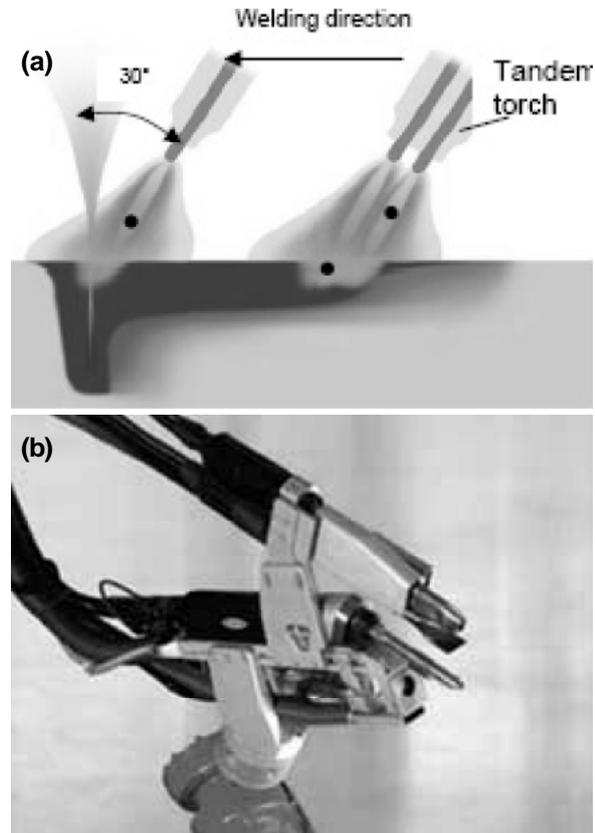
Schematic representation of laser welding apparatus, replotted from [5].
